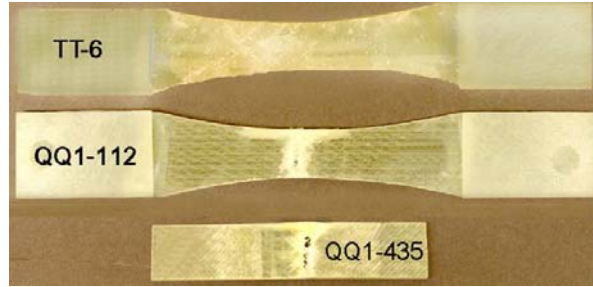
Failed fatigue dog-bone and rectangular specimens, showing grip-edge failure for a rectangular specimen (bottom) and gage section failure for a dog-bone specimen.
